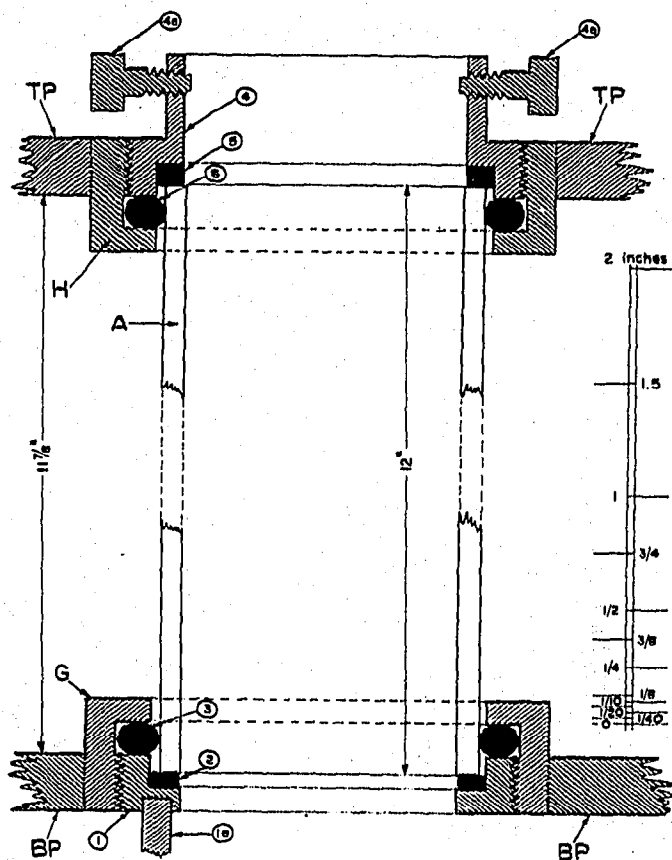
Axial section showing tank fittings G and H for 1 in. column.
